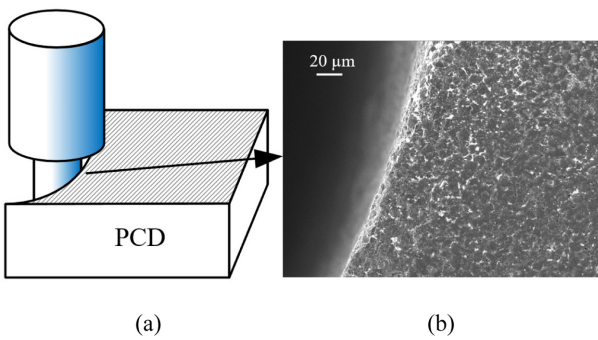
(a) PCD tool used for mechanical machining of micro pin and (b) SEM image of PCD surface
